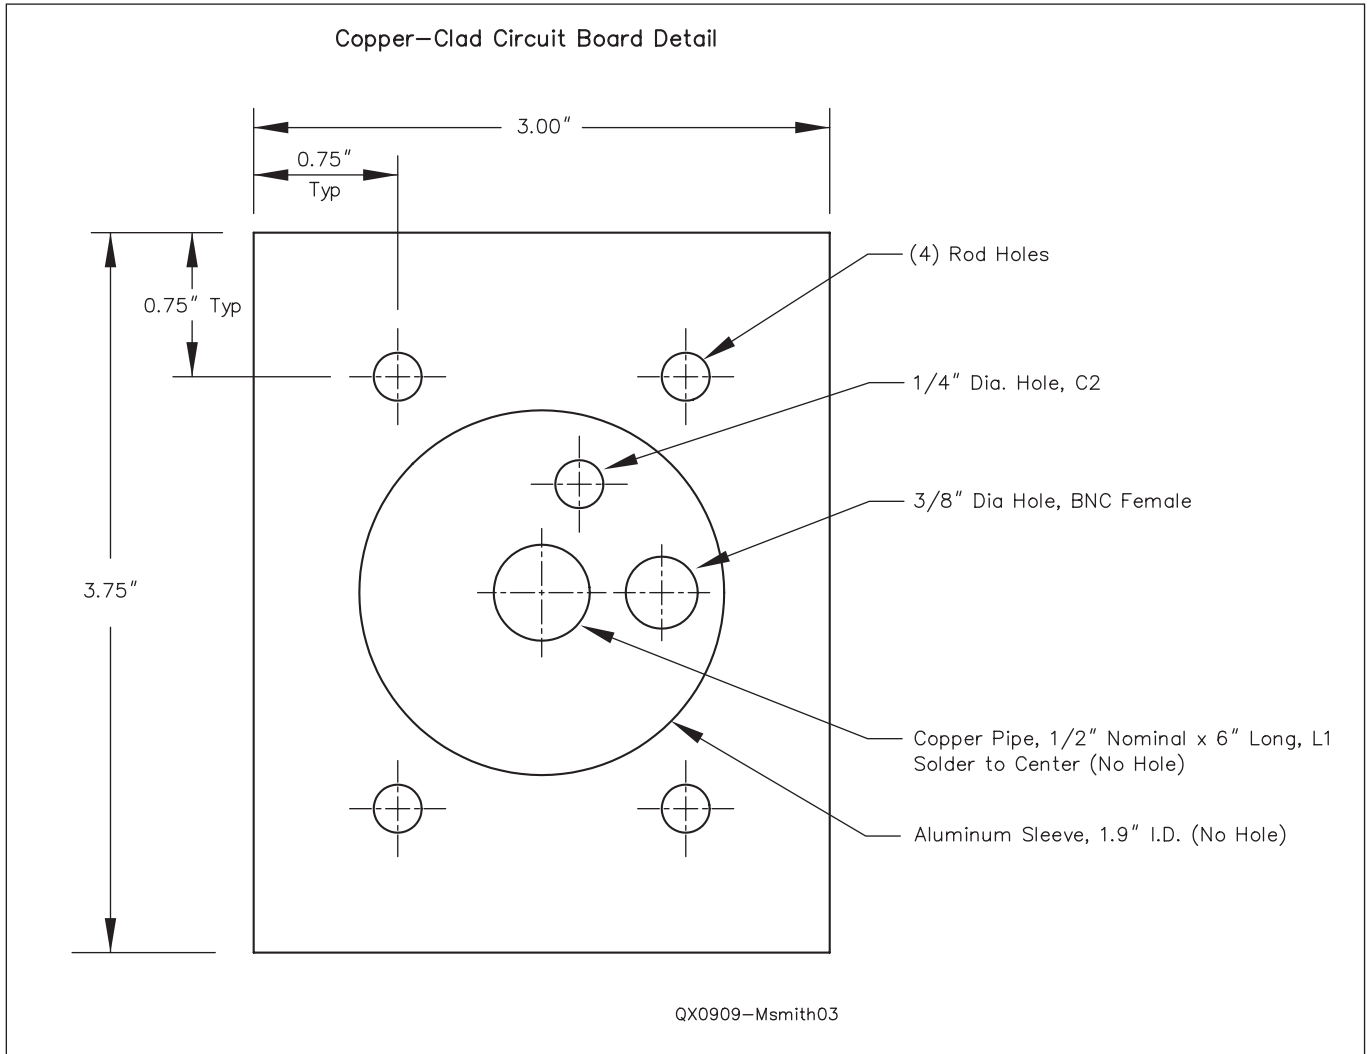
This illustration shows the construction details for the copper-clad circuit board material used to form the end caps for the duplexer cavities.
